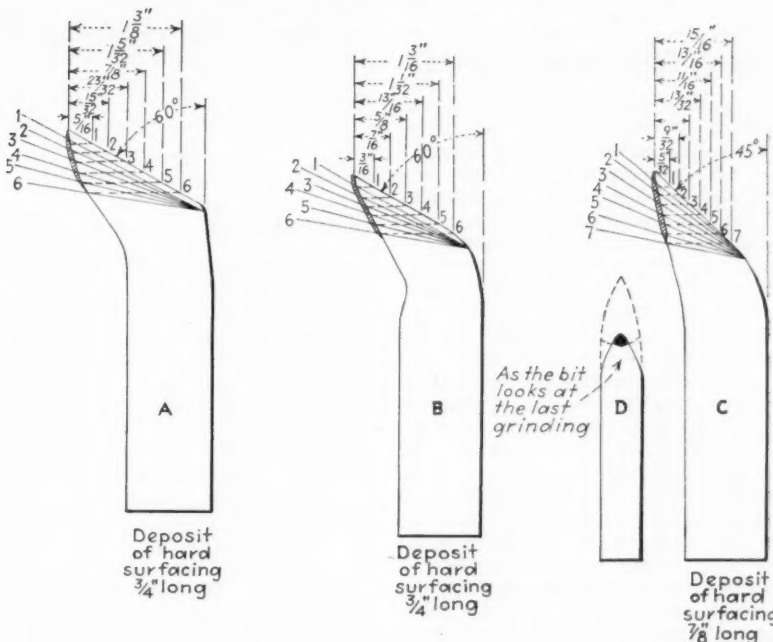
Details of rest used in grinding hard-surfaced machine bits
